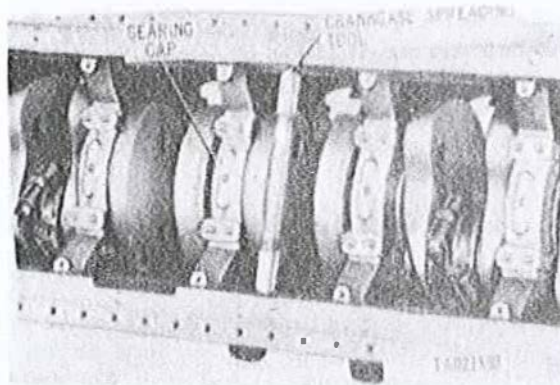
Installing main bearing caps using crankcase spreading tool.
